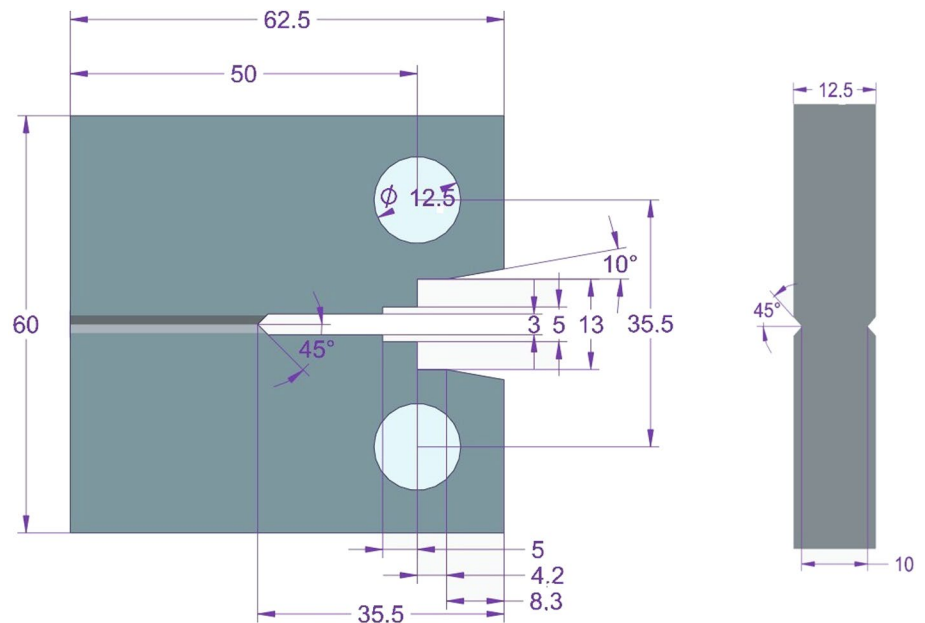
Geometry and dimensions of type C(T) specimen used in creep growth tests in millimeters
